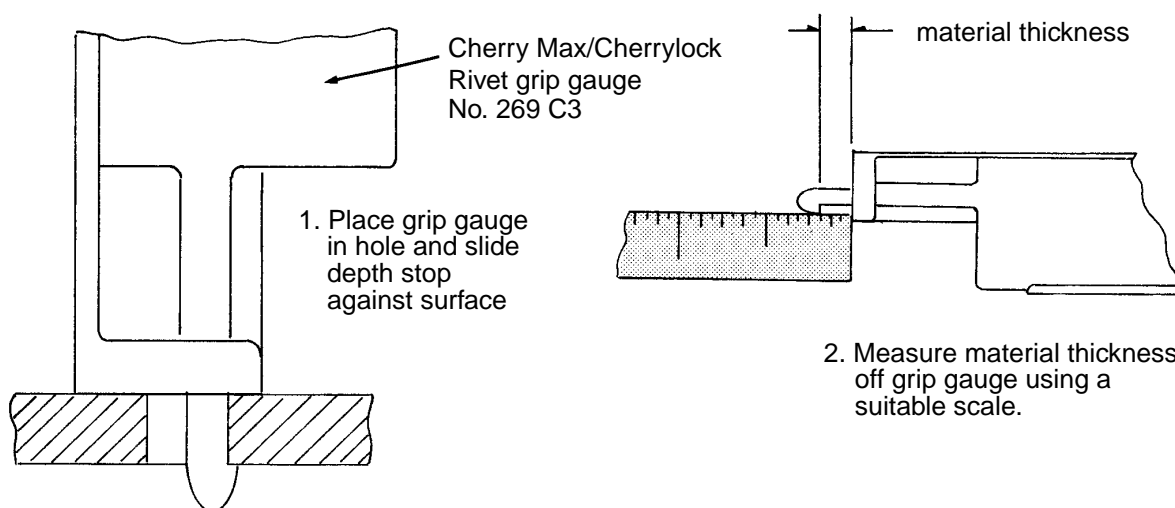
Use of a Rivet Grip Gauge to Check Material Thickness
